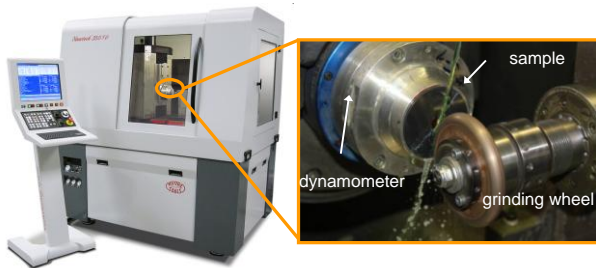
Used machine tool, force measurement equipment and grinding cinematic
